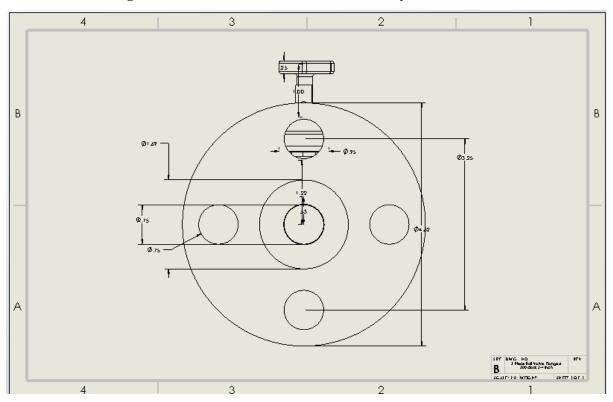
2-Dimensional Sketch of assembly (Side view)
